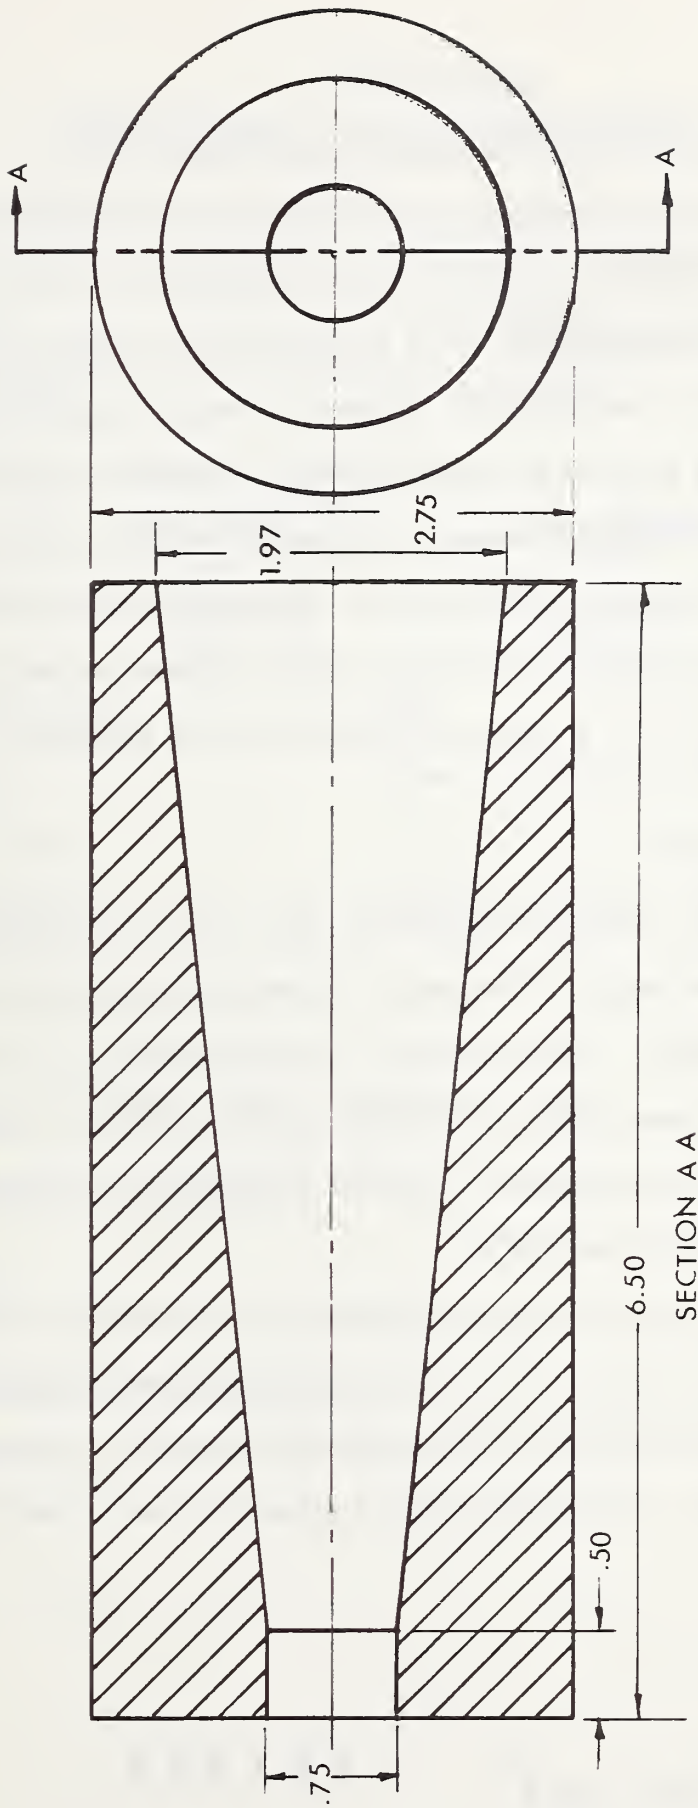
NBS H3M Experimental End Fitting for 1/2-in (13-mm) Diameter Rod. All Dimensions in Inches (1 in = 25.4 mm)
